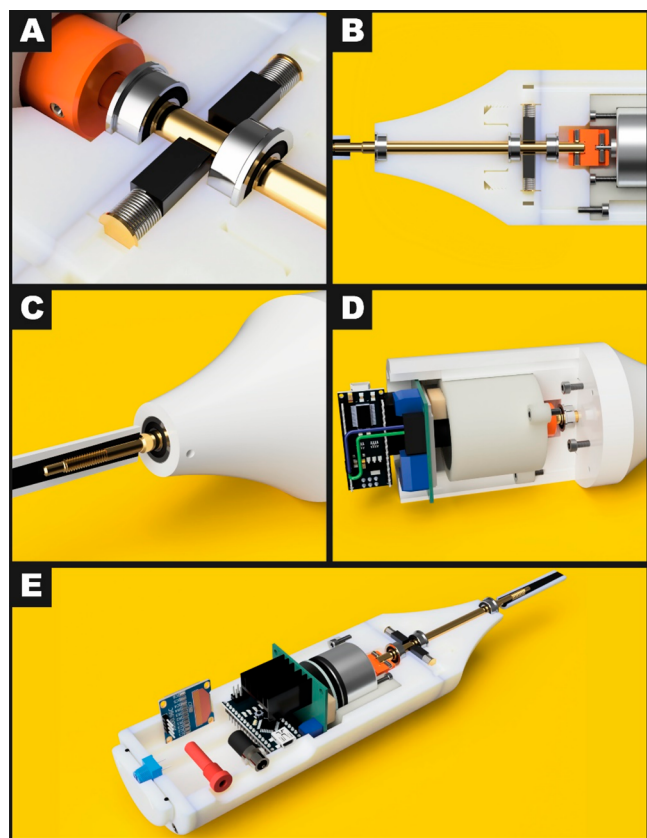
Design of additively manufactured rotating disk electrode setup. (A) Cross-sectional CAD view of carbon brush configuration and shaft coupler. (B) Cross-sectional CAD view of motor, coupler, shaft, and bearing configuration. (C) Detailed view of electrode shaft design. (D) Cross-sectional view highlighting flexible motor housing. (E) Full additively manufactured rotation disk electrode overview.
